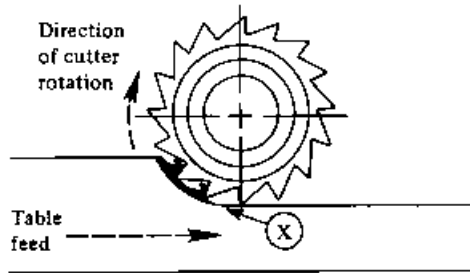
Up milling rotating direction (Geoffrey Boothroyd and Winston A. Knight, 1989)
